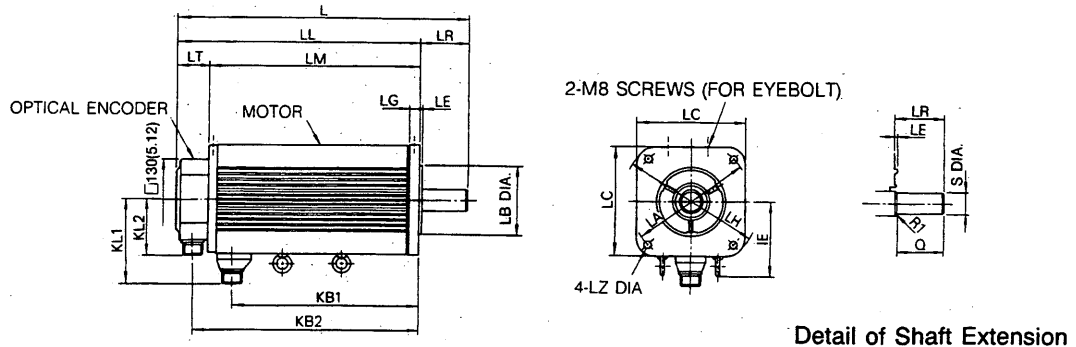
USAGED-05AS1, -09AS1 (Taper Shaft), -13AS2 (Straight Shaft)
